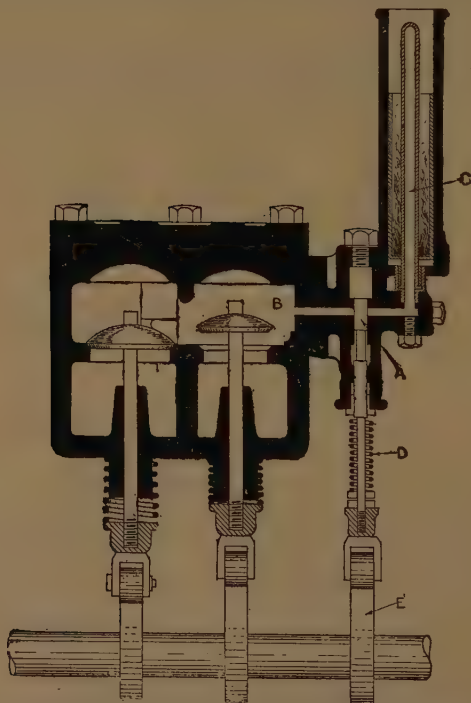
,904.—Sectional view through valves of engine showing hot tube method of ignition. This is a modification of the method described in the accompanying text and is more exact and satisfactory. In construction, a valve A, commonly called the timing valve, is provided, and which is interposed between the admission valve chamber B (communicating with the clearance space of the cylinder) and the interior of the hot tube C. This valve is normally held closed by the spring D. When the piston reaches its inner dead point at the end of the compression stroke, a cam E, on the secondary shaft, opens the valve and allows a portion of the compressed charge to pass into the hot tube where it ignites. The timing valve is held open throughout the power and exhaust strokes, thus permitting the products of combustion to be carried out of the tube with the exhaust.
